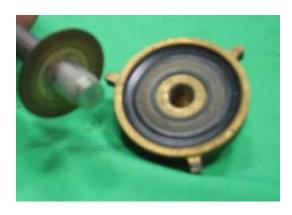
PRV 349 Corrosion of Gasket Retainer
